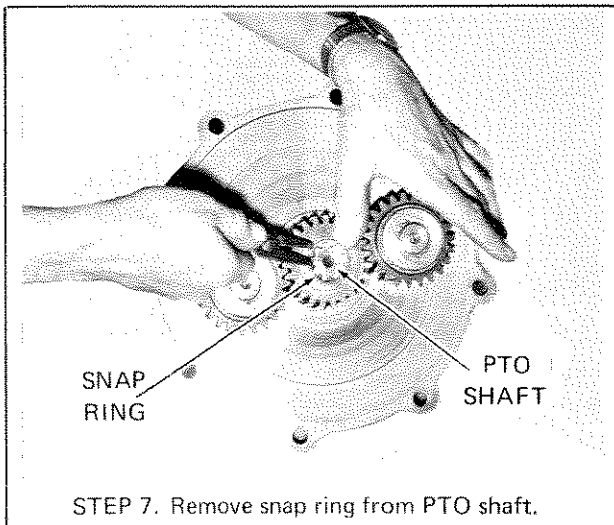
Removal And Disassembly Of PTO Shaft Assembly, Lo-Speed (Sheet 2 of 4)
